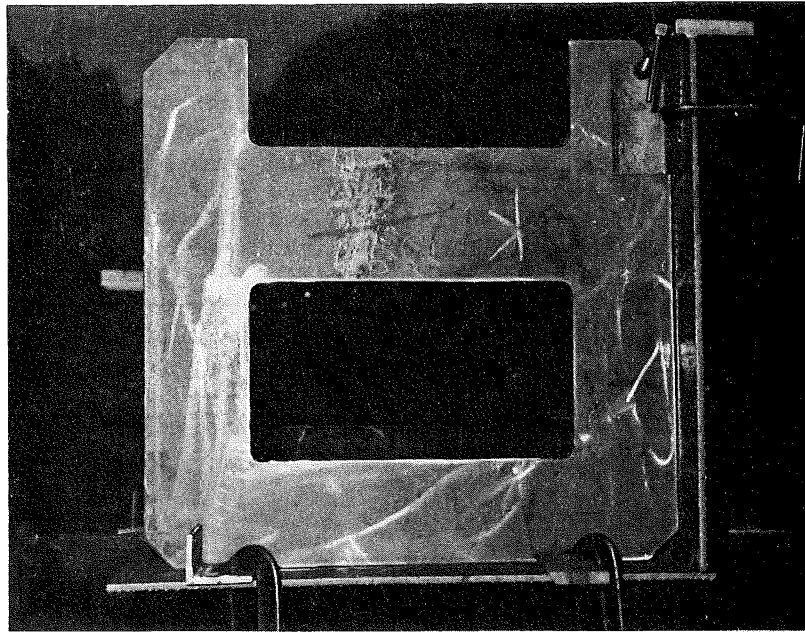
Web, Bottom Flange and Plate-Type Diaphragm Fitted Up in Jig for Welding
